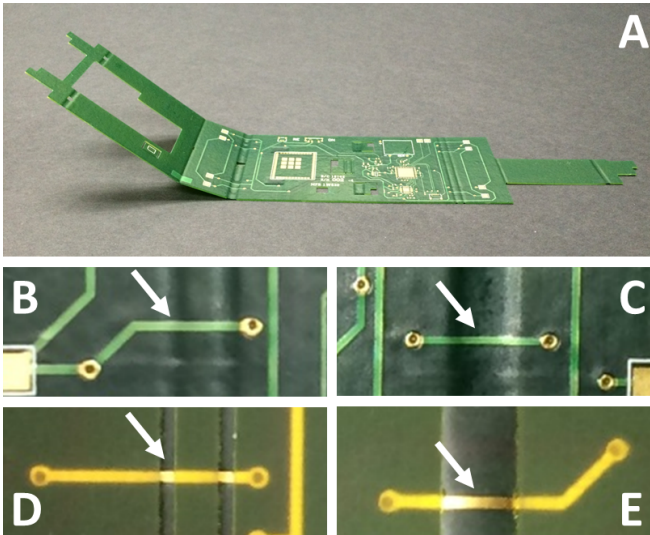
First PUFFER rigid-flex chassis iteration, using conventional two-layer flex circuit with added stiffeners. Complete PCB shown in (A), with slight bend to illustrate location of flexures. (B) through (E) show the sample flexures that were cycle tested, with arrows highlighting specific location of bending: a short top side flexure (B); a long top side flexure (C); a short bottom side flexure (D); and a long bottom side flexure (E).
